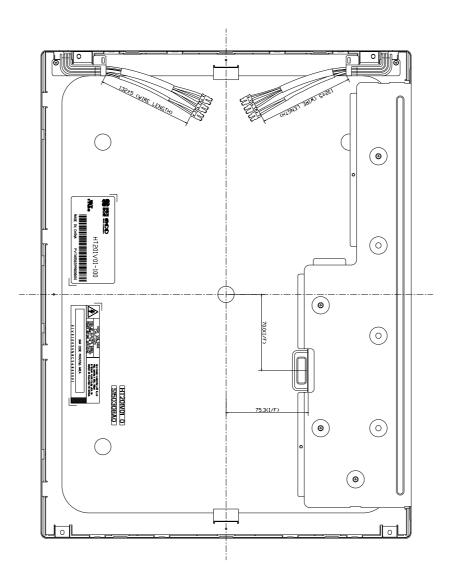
TFT-LCD Module Outline Dimensions (Front view)
